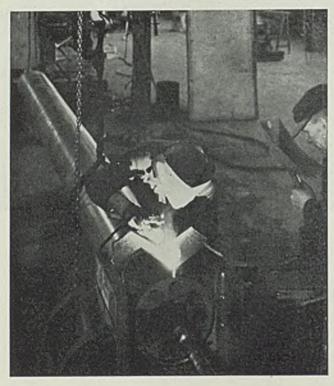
Held tightly against the shell by circular die blocks in a hand squeezer or hydraulic press, the edges of the cover sheets are joined together on both sides by tack welds at intervals of approximately 1-inch. The joints are completed subsequently, the electric arc method being employed
